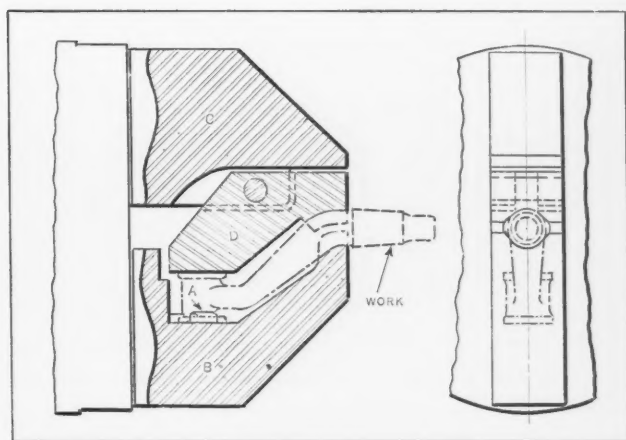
Lathe Chuck in which Automobile Steering Arms are Held while Turning the Shank
